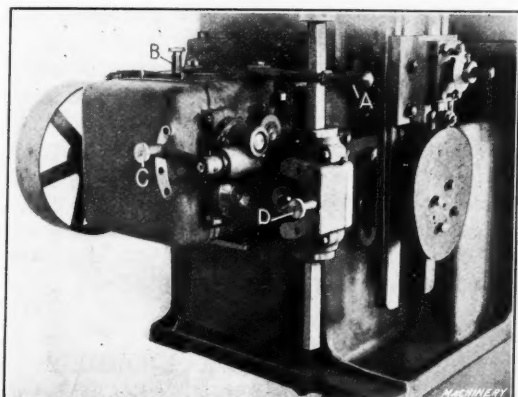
Close View of Gear-box on Rowbottom Cam Miller
